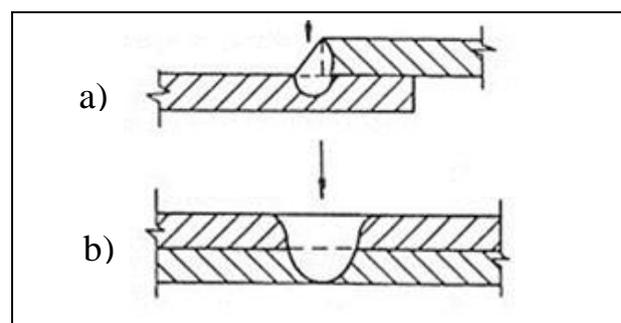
Design of lap joints used for EBW- a) fillet lap joint b) through-welded lap joint
